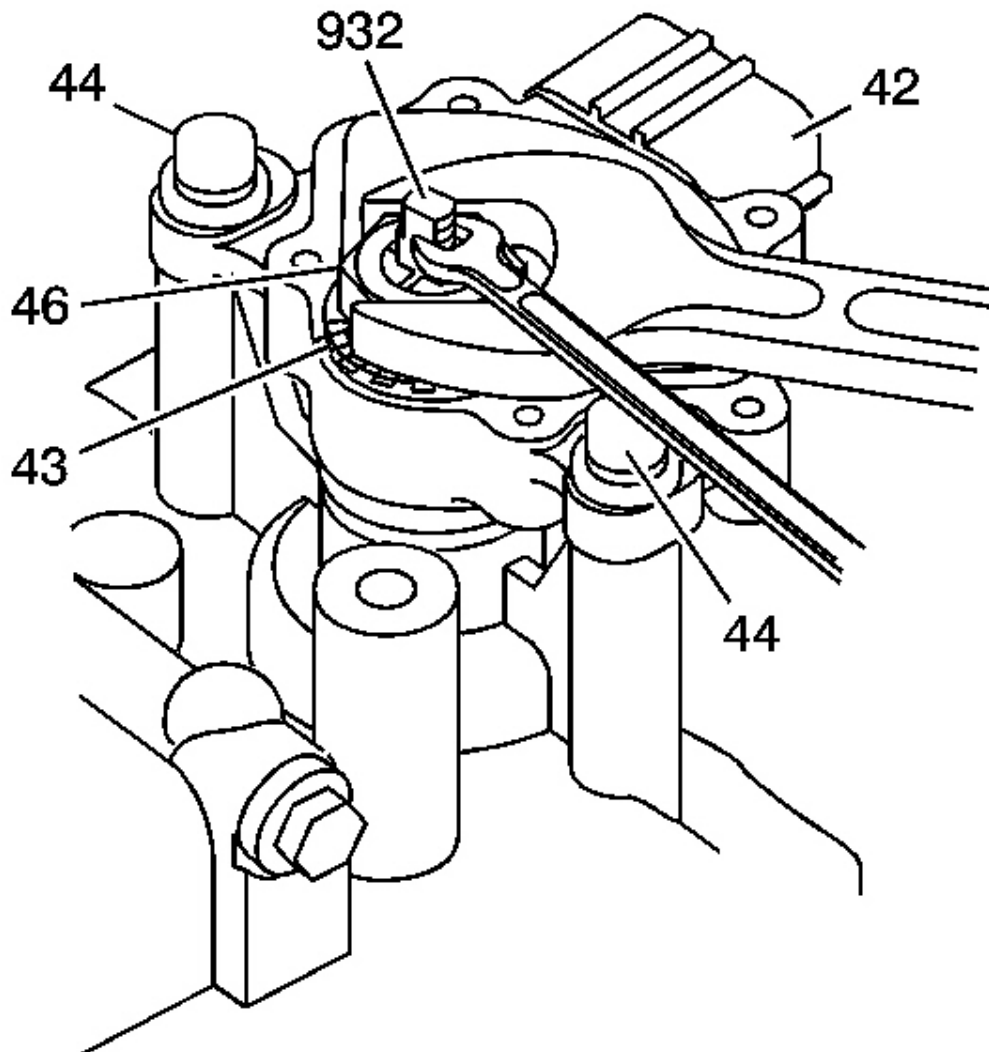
Tightening The Locknut & Flanged Bolt/Screws
